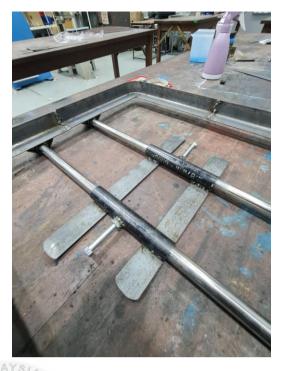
2 pieces 0.5 cm hollow steel pipe welded together with 2 steel plates
